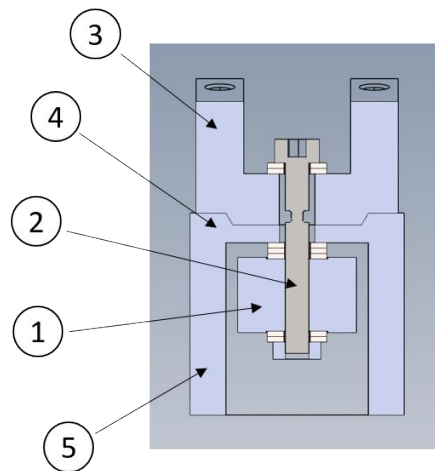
Section view of the LL mechanism, with indication of the model's lumped elements. 1) SMA actuator; 2) notched screw; 3) upper support; 4) lower support, upper part; 5) lower support, lower part.
